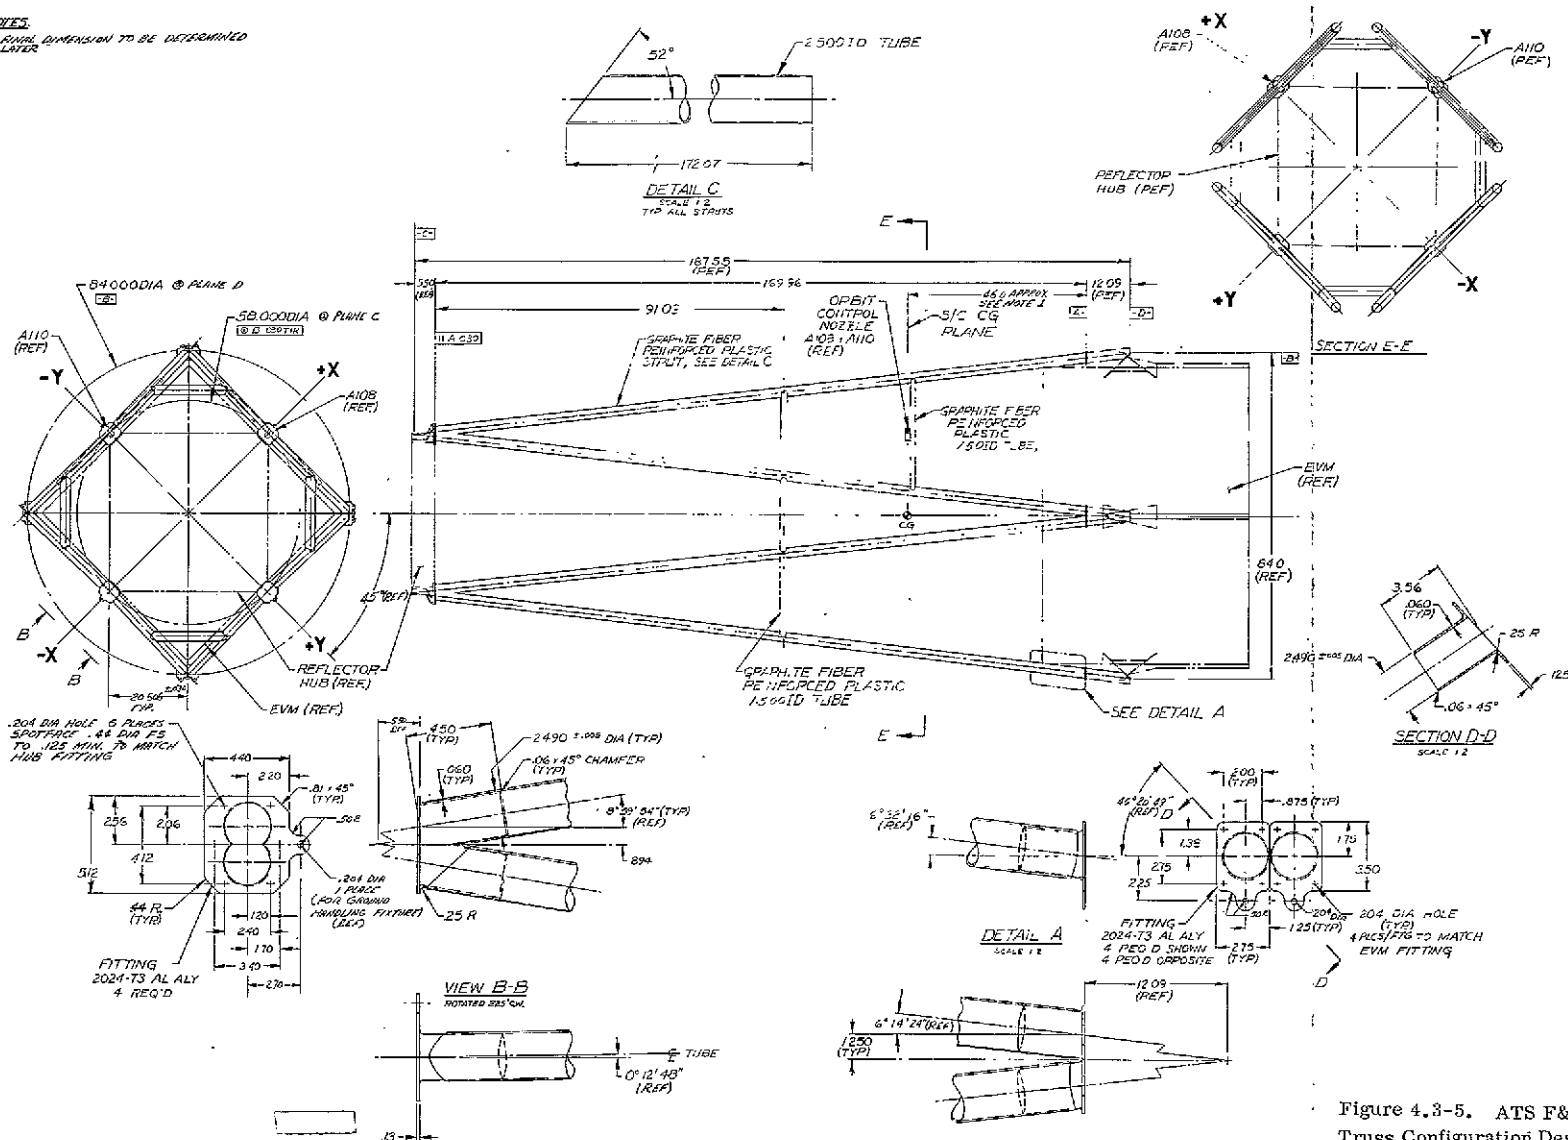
ATS F&G Reflector Support Truss Configuration Design Layout
